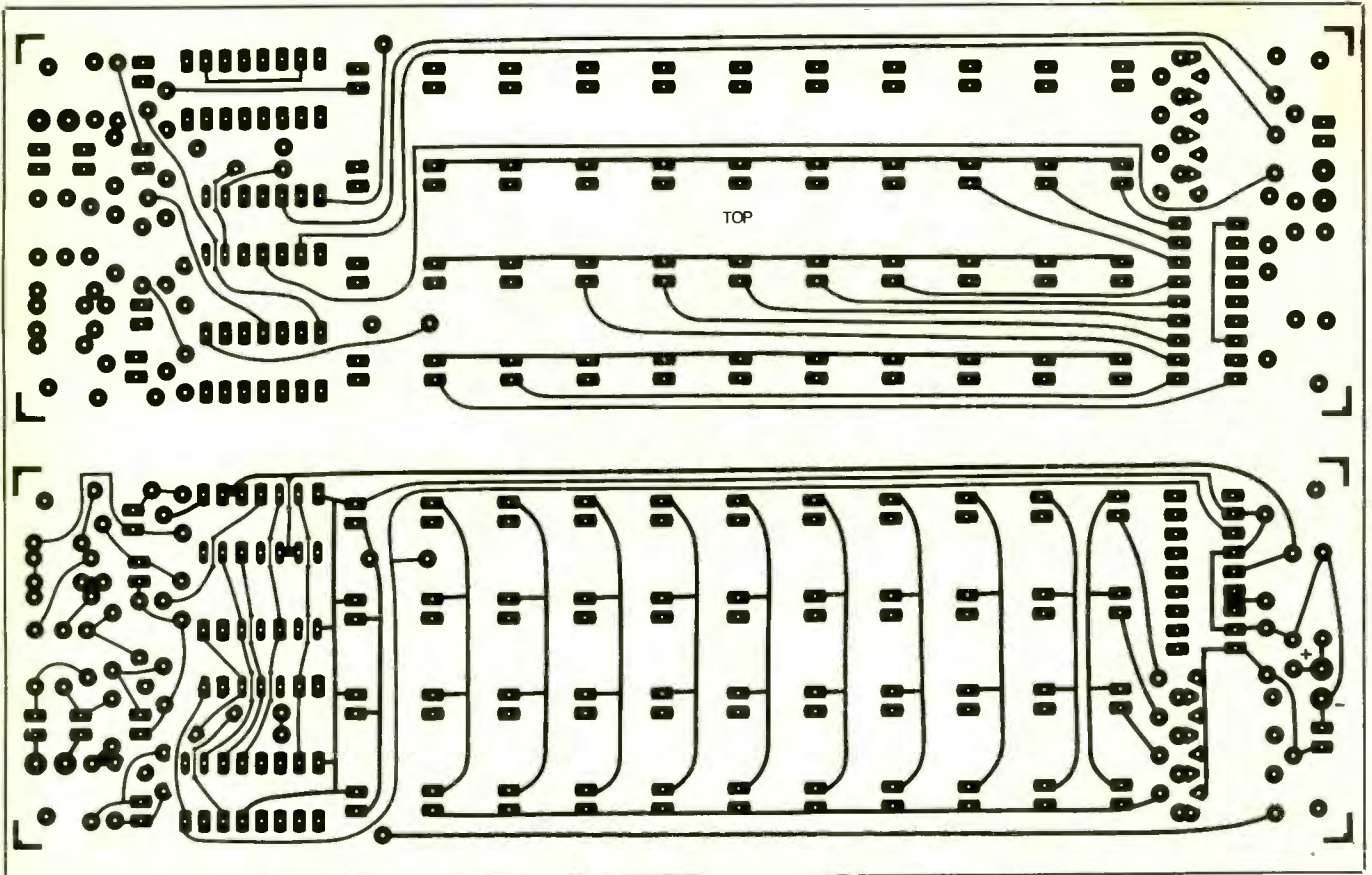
Actual-size etching-and-drilling guides for top and bottom of double-sided printed-circuit board.
